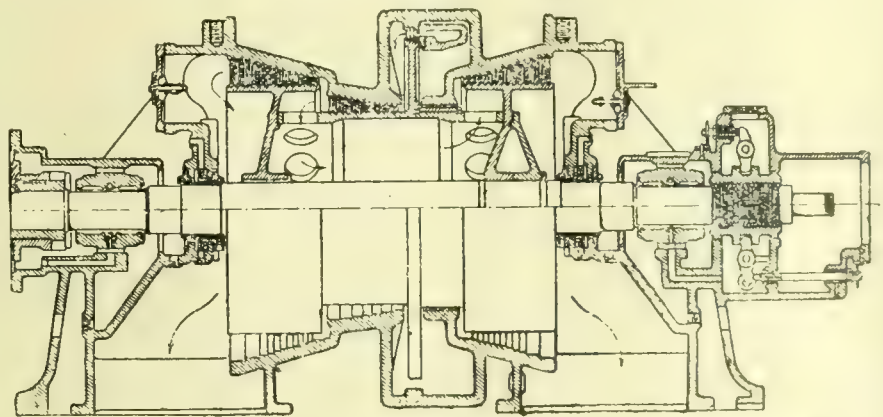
COMBINED DISC AND DRUM SINGLE-FLOW, DOUBLE-FLOW TURBINE. WESTINGHOUSE COMPANY, 1906.
